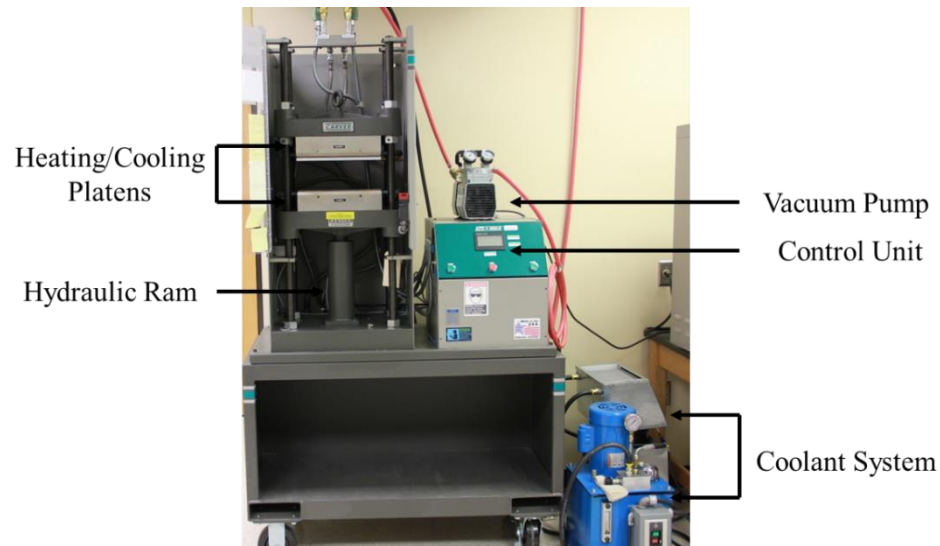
Carver 4NE automatic hydraulic press with supporting vacuum pump and cooling systems.
